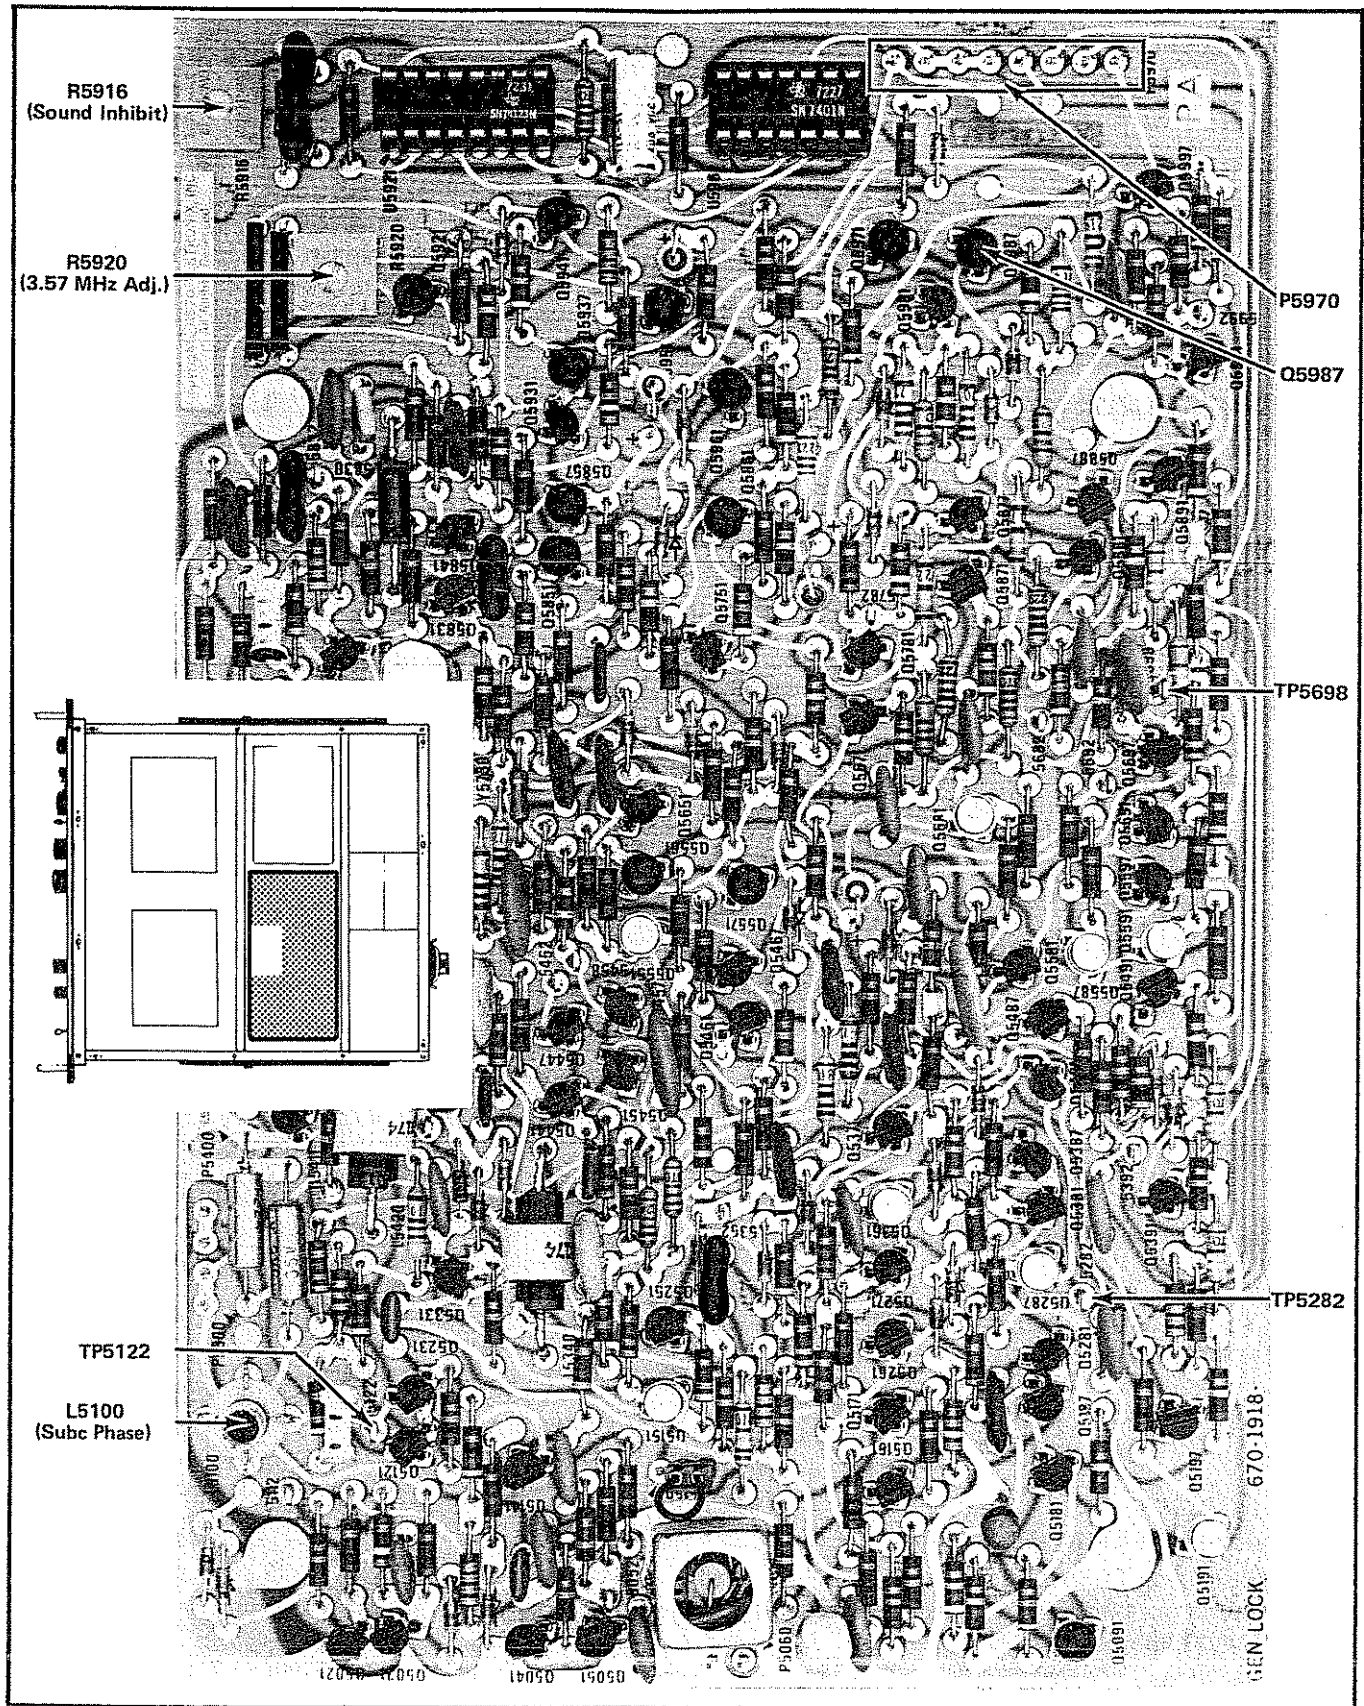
Gen Lock test point, pin connector, and adjustment.
